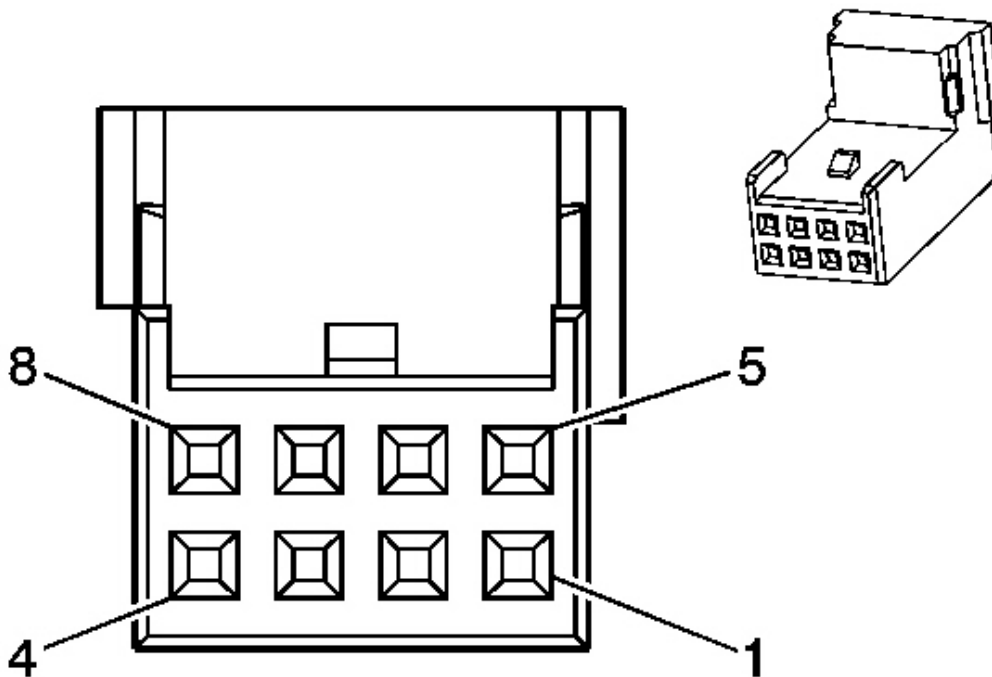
Outside Rearview Mirror Switch Connector End Views
